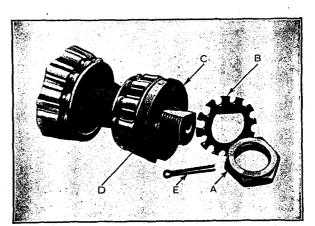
Front Wheel Bearings and Adjusting Nuts.
